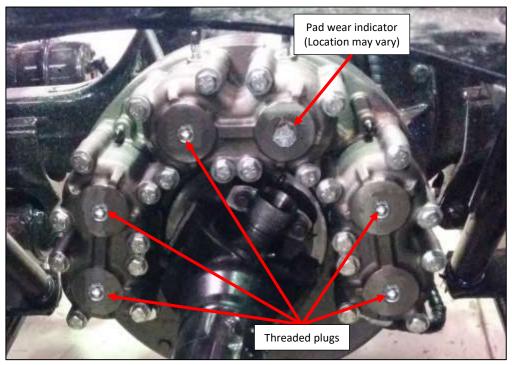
Failsafe Emergency brake threaded plugs and pad wear indicator (HV19 shown).
